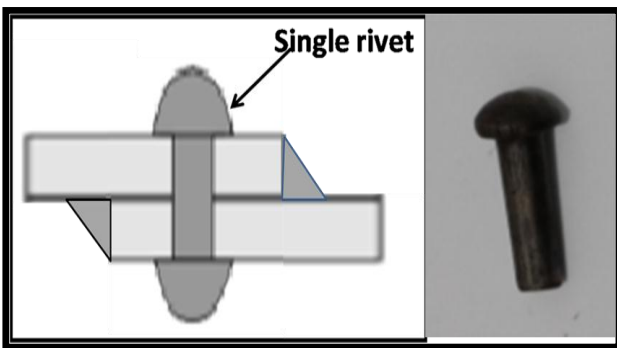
Rivet /double fillet welds mixed joint
